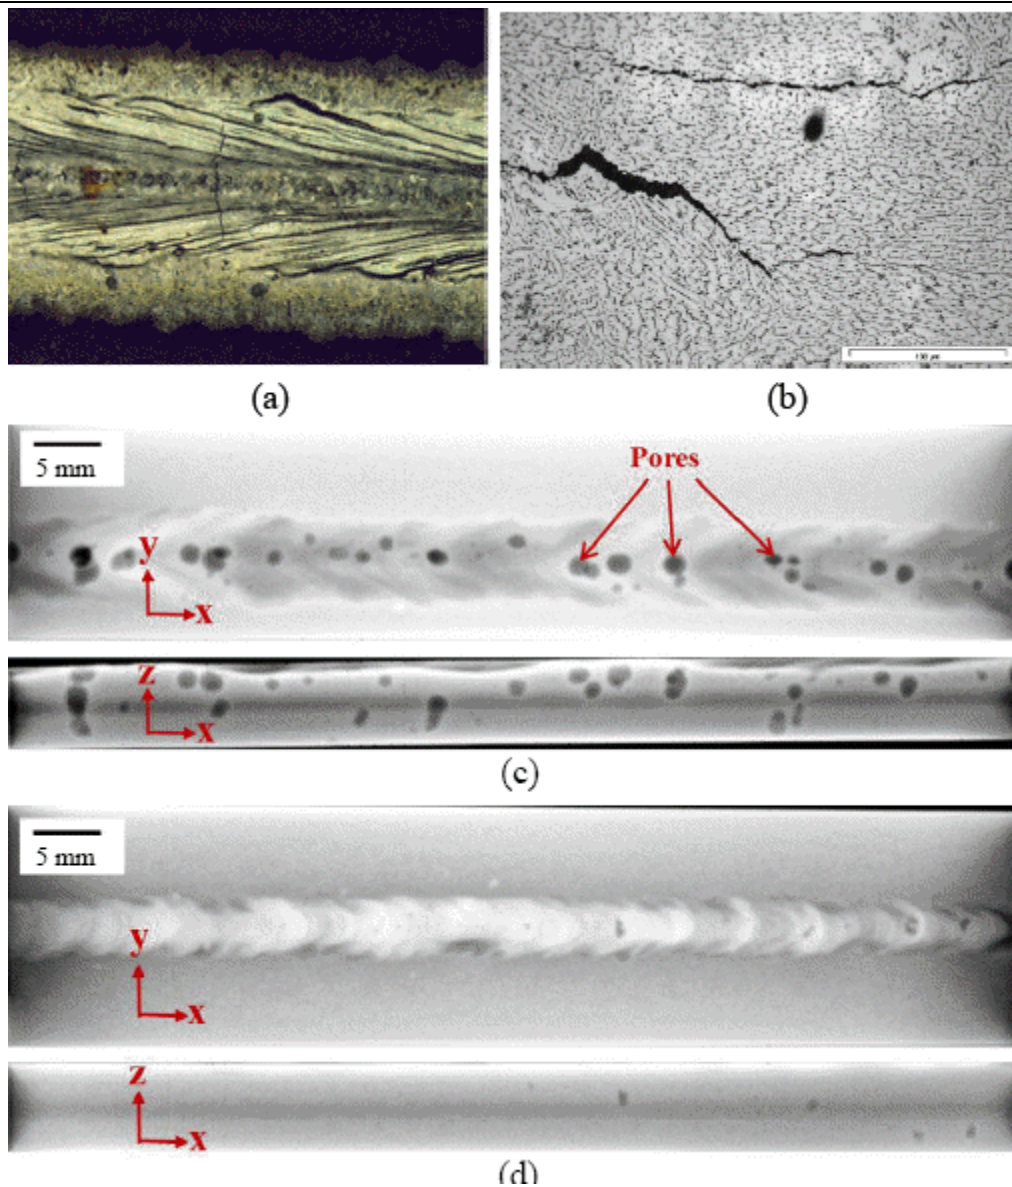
Defects of welds: a) – transverse cracks on the upper roller of the Al7075 sample, welded by the laser-arc method; b) – a typical crack in the HAZ of the Al7075 sample welded by the laser method; c) – radiograph showing the degree of porosity in the Al7075-T651 sample welded by the laser-arc method; d) – radiograph of seams obtained by laser welding with cold wire 4043.
